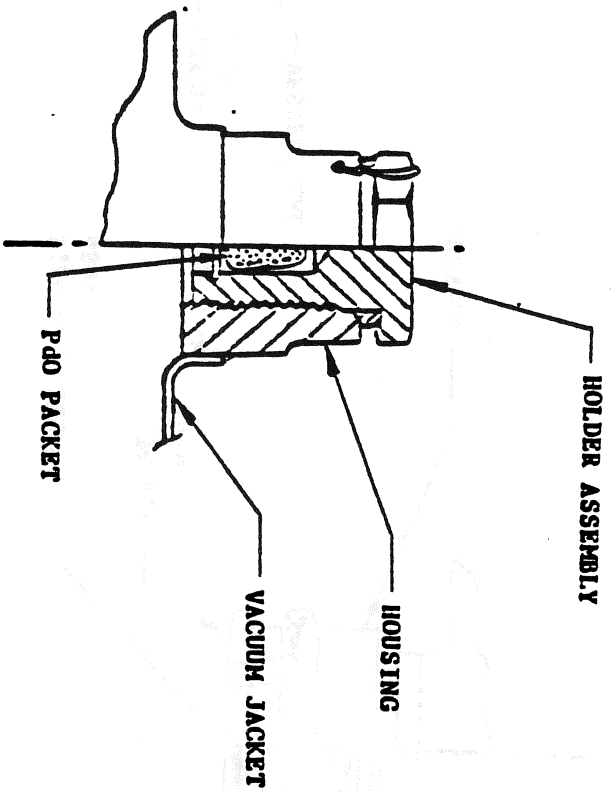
DETAIL - PLUG & DISC ASSEMBLY (REPLACEABLE PART)
